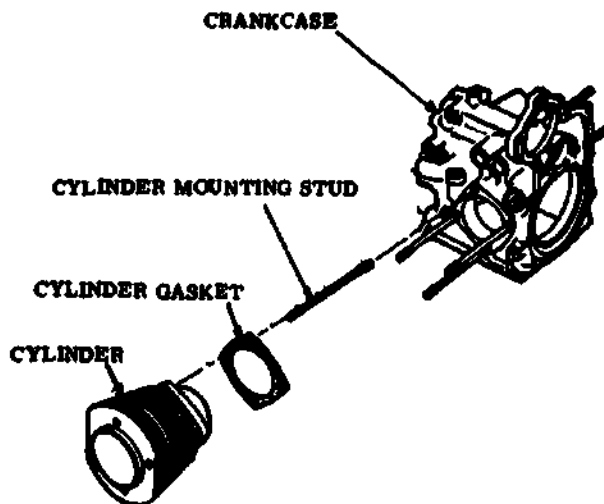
Air-cooled engine crankcase and cylinder assembly.
